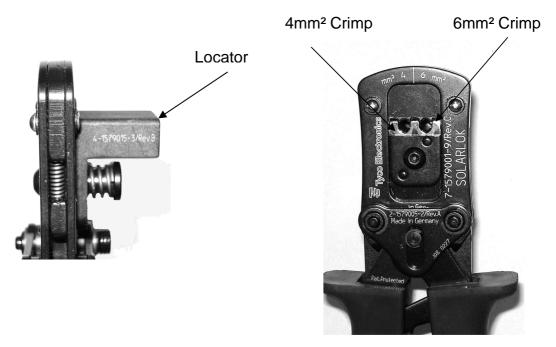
Designations at the Crimping Tool (e.g. Hand tool TE-PN: 1-1579004-2 (see Table 3 SOLARLOK Tools)
